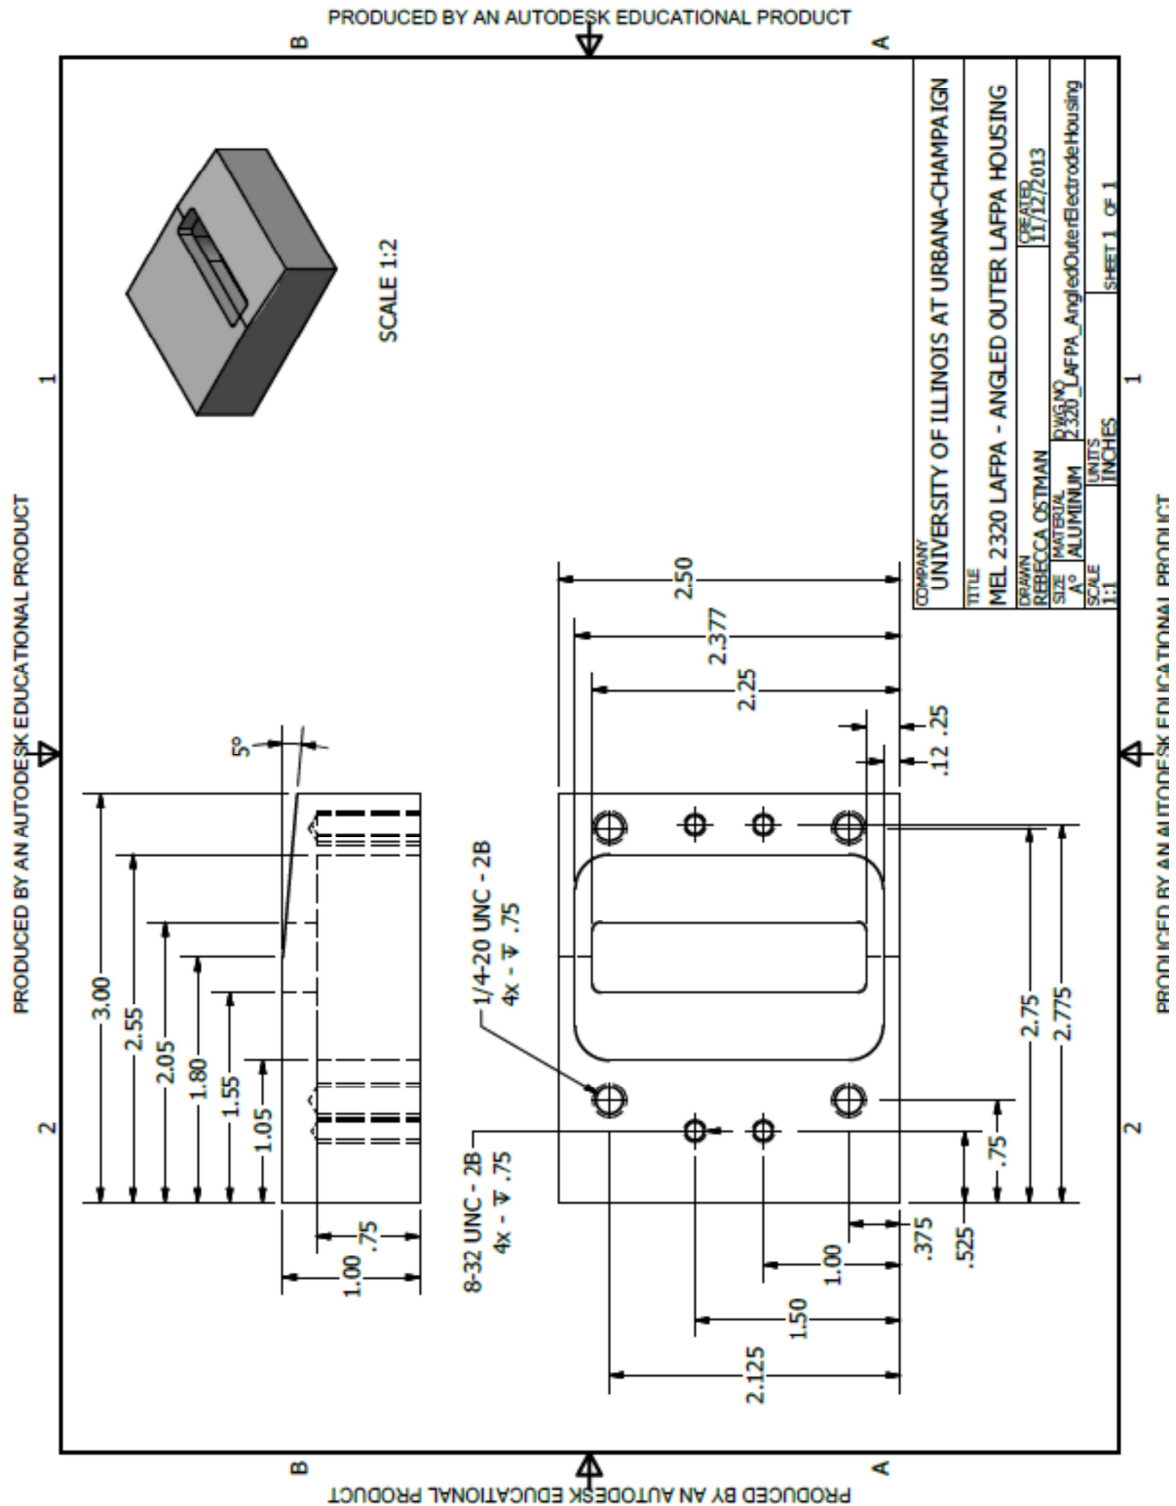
Drawing and specifications for the outer piece of the electrode housing for the LAFPA on the ramp corner assembly.
